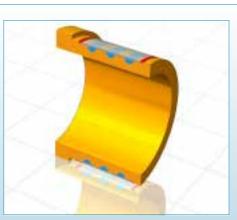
Structure of a liquid-cooled engine housing with substance-to-substance bonded metal sheet covering
